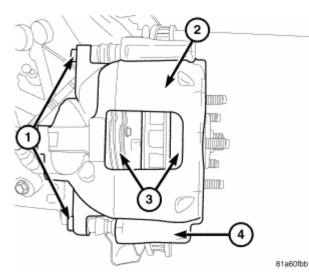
Identifying Caliper Mounting Bolts, Disc Brake Caliper, Inboard/Outboard Pads & Adapter
